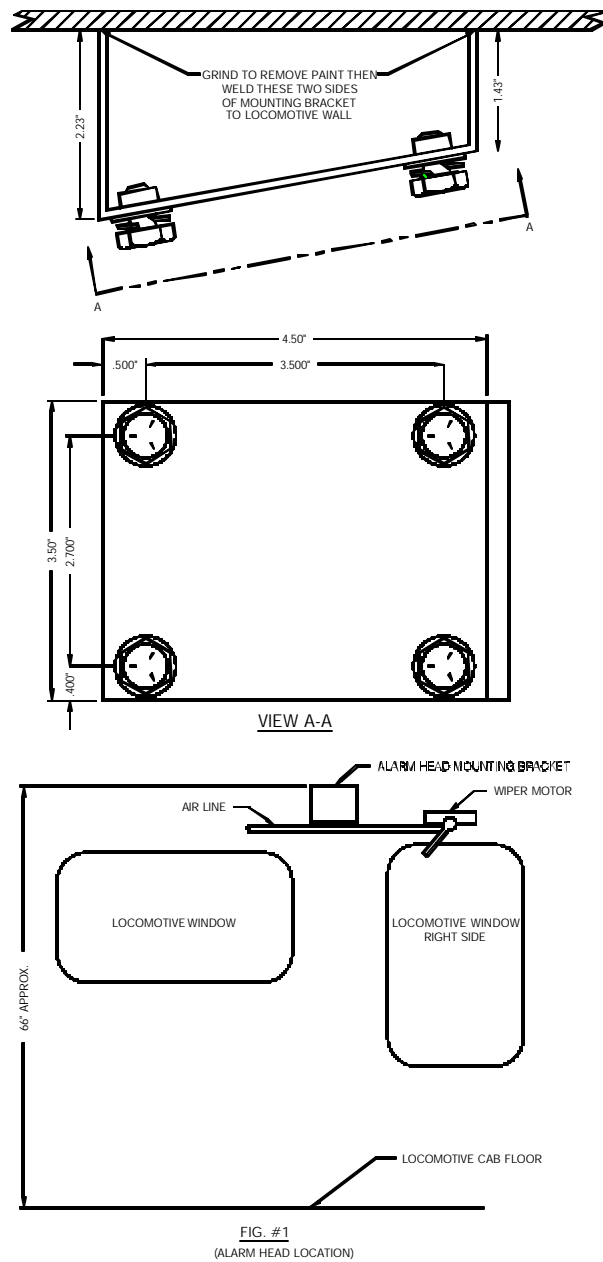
Optional Crew Alert Alarm Panel, Mounting Bracket (Q-Tron Part No. 71701105)
